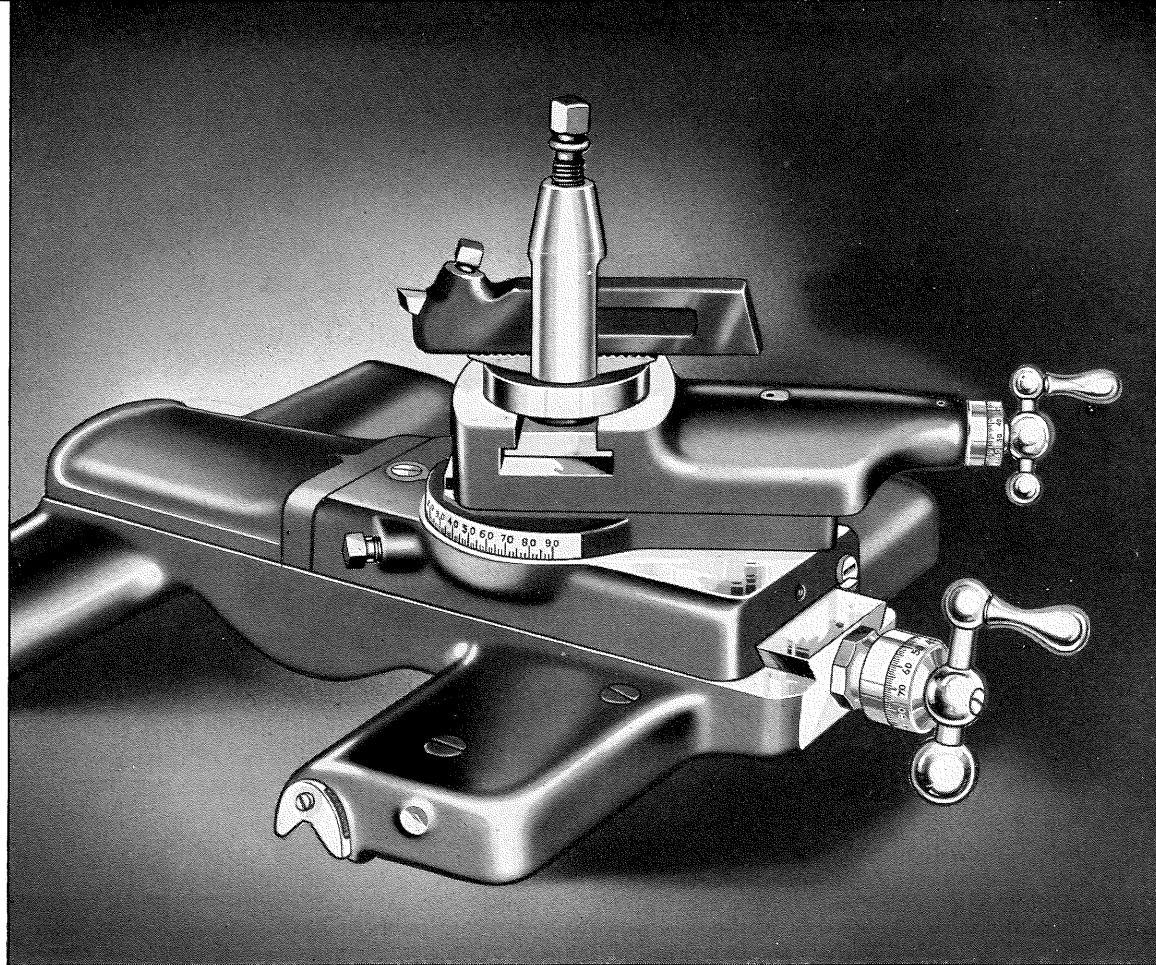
Improved Saddle and Compound Rest for South Bend Lathes
